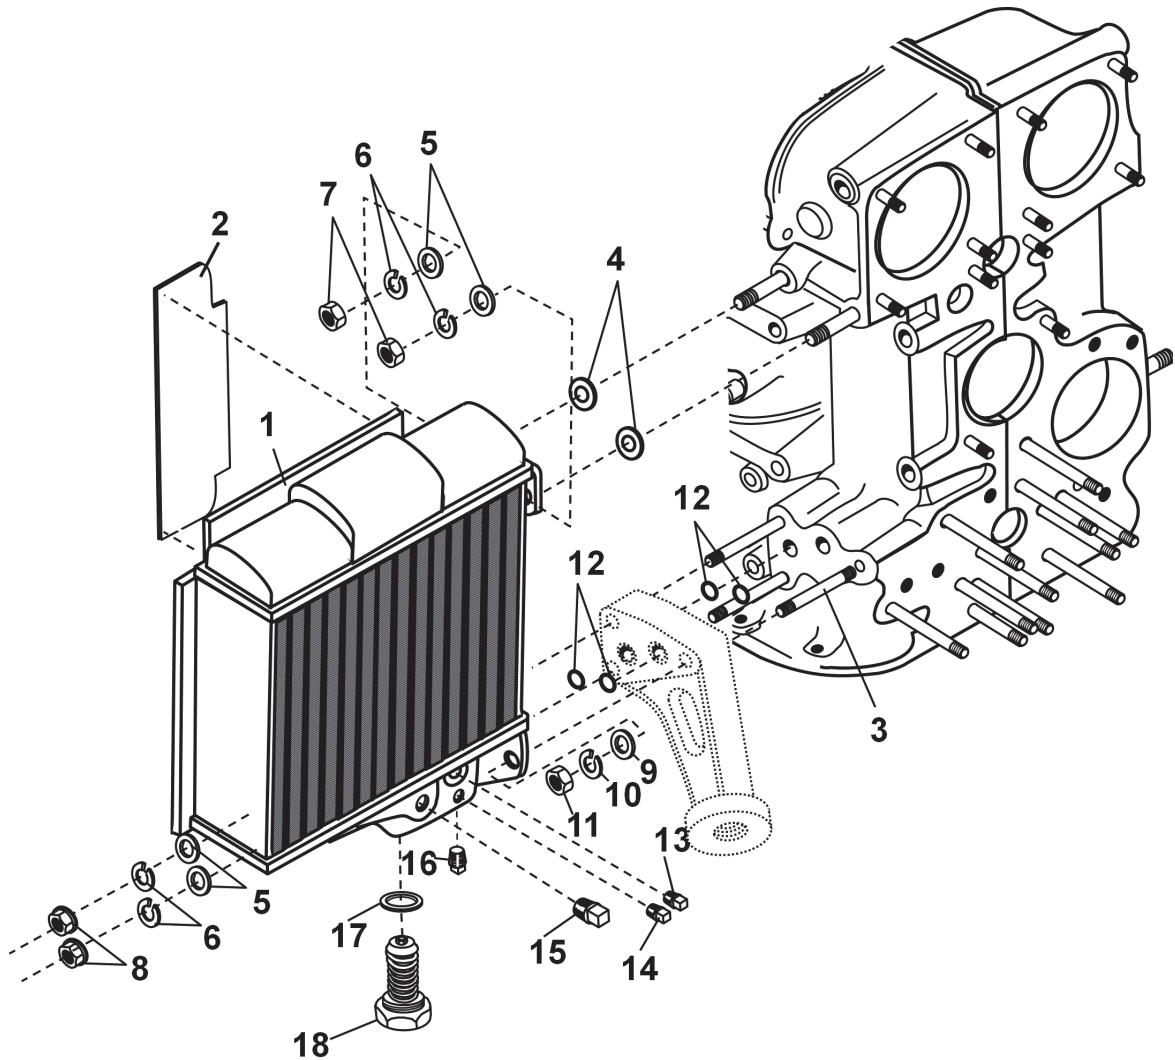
IO-550-A & B Oil Cooler Assembly A B
